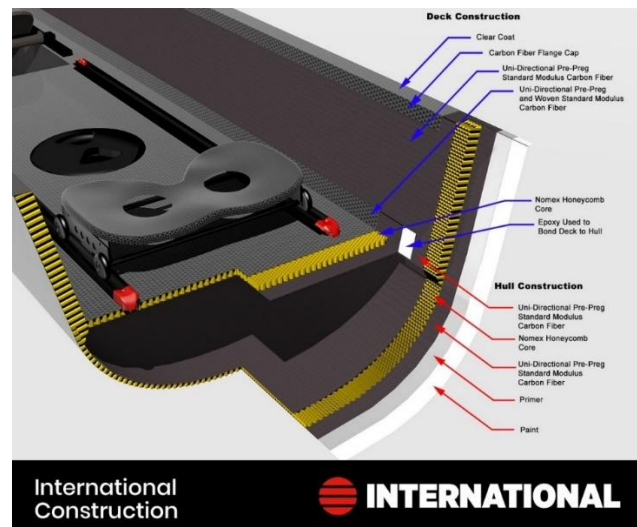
Honeycomb shell design. Source: Wintech racing full core hull build. <https://www.wintechracing.com/technology/hull-construction/>
